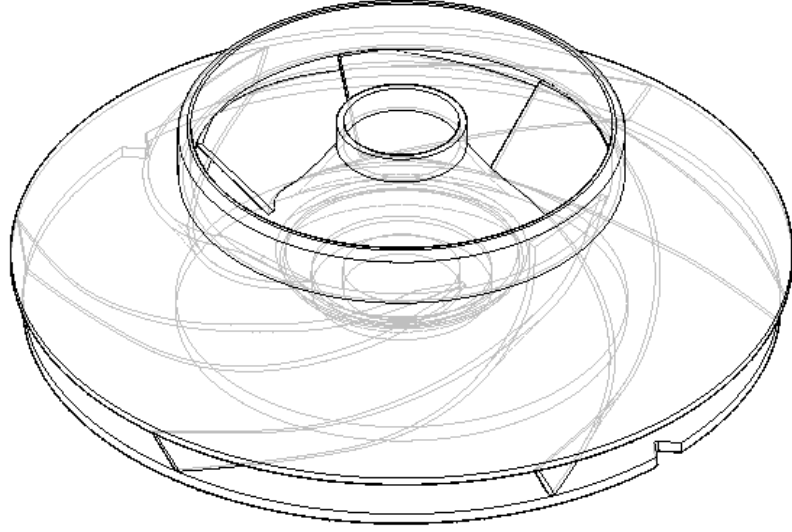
three-dimensional view of test rig pump impeller CAD model
